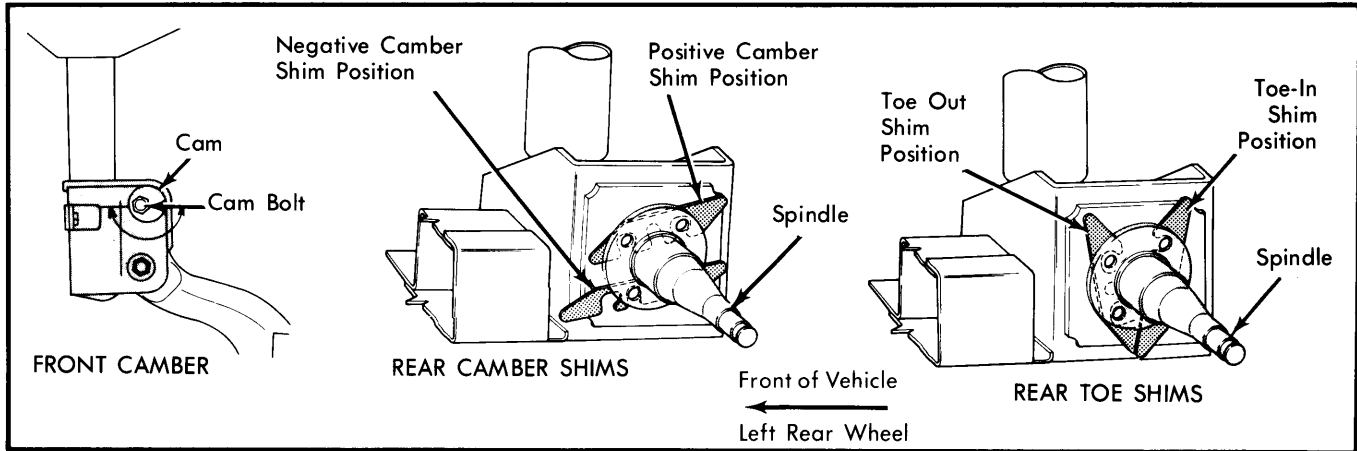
Adjusting Front Camber, Rear Camber and Toe-In on Front Wheel Drive Models
